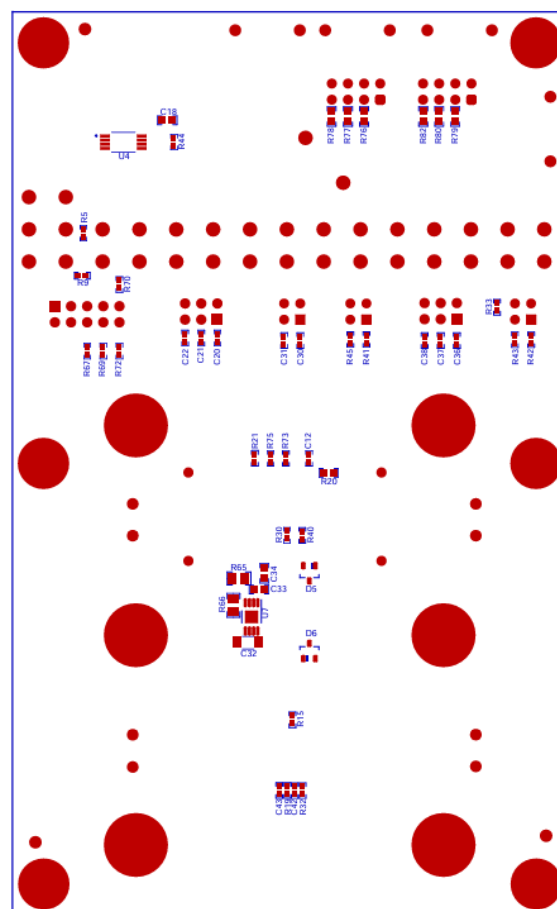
TPS1686-87EVM Board: Bottom Assembly
